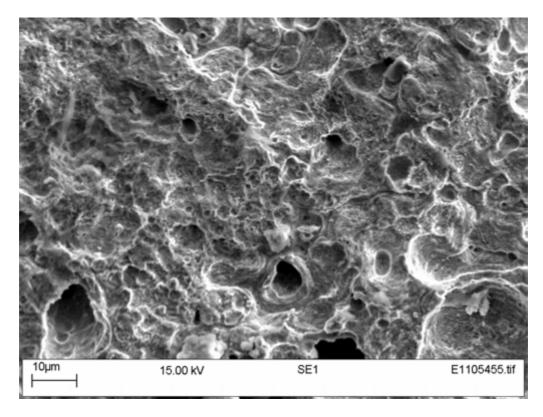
SEM fractograph, showing detail of figure 37 and fractography consistent with corrosion damaged ductile microvoid coalescence type fracture.
